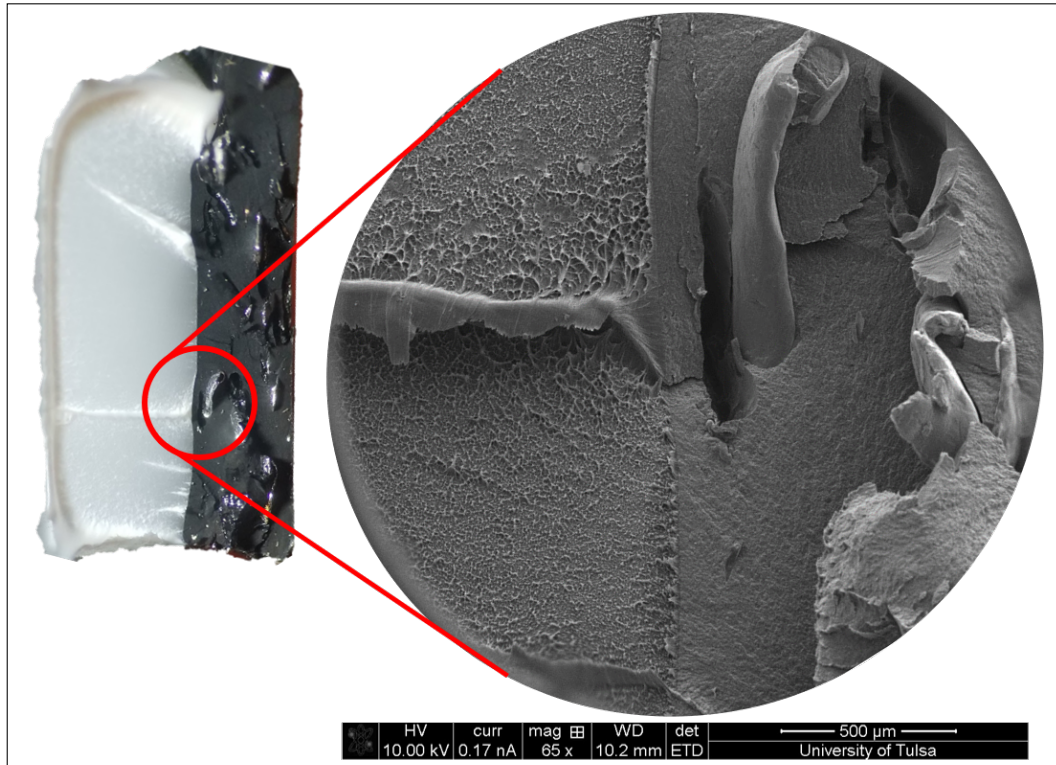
Fracture surface of a bilayer tensile specimen as seen with a scanning electron microscope.
